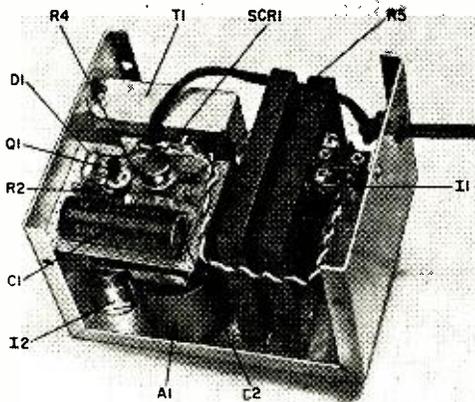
The perforated circuit board is secured to the side of the chassis with a small L-bracket. Resistor *R1* is mounted directly on bulb *I1*'s socket.
